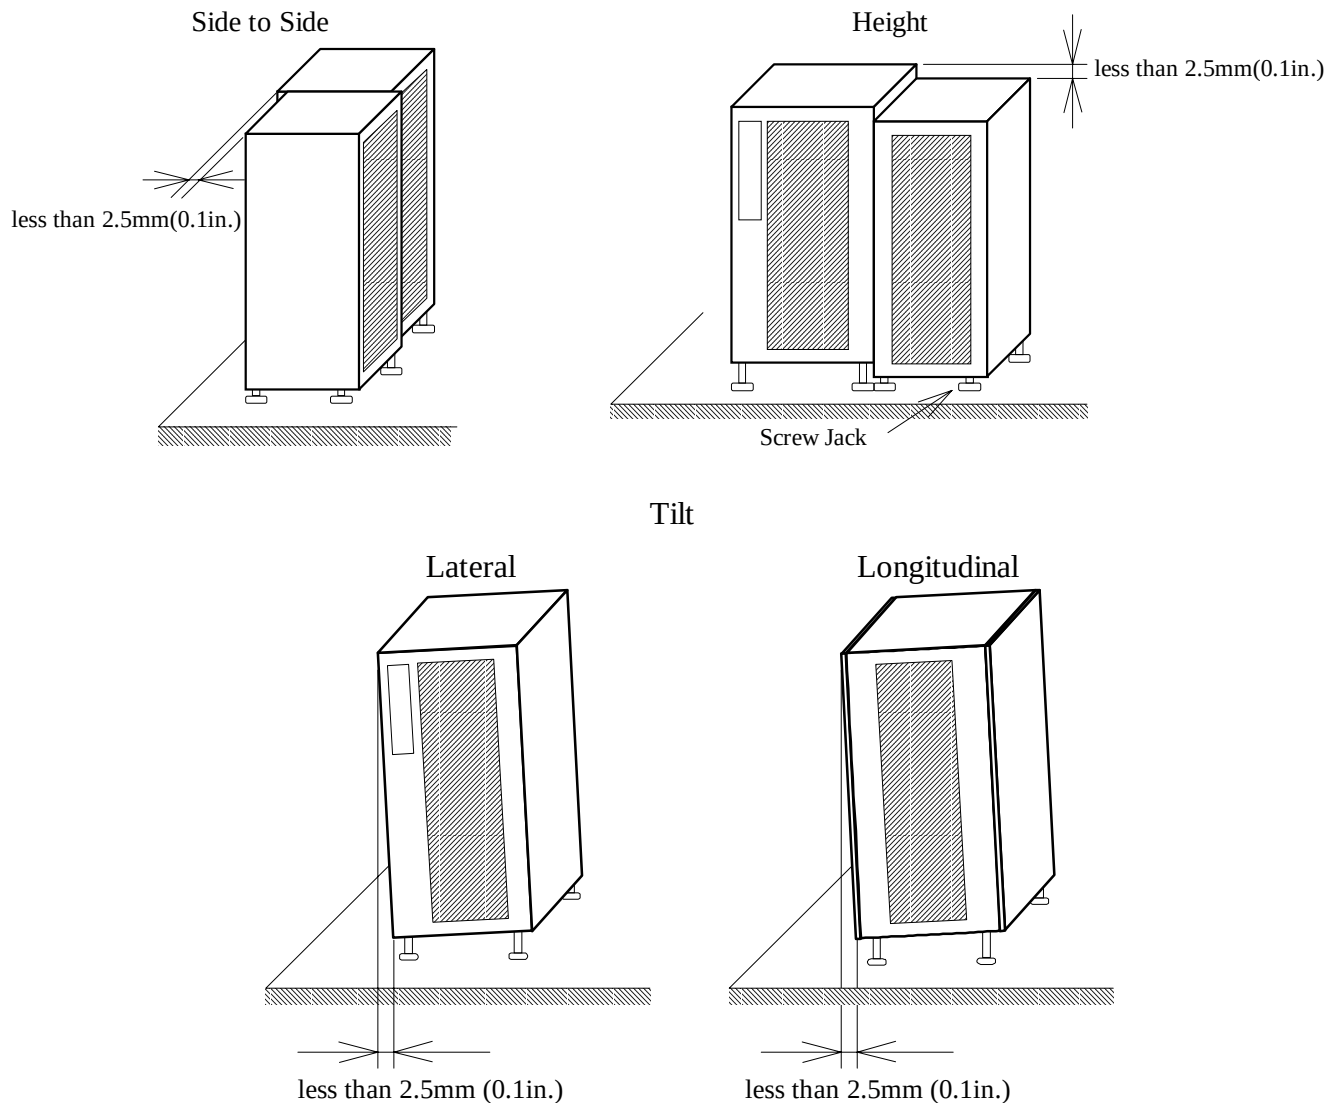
Unit Layout, Height, and Tilt
